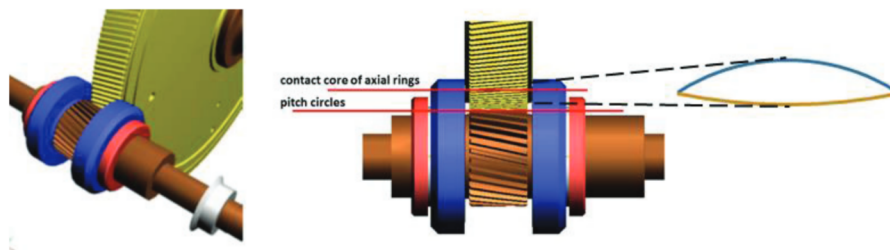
A 3D pattern with a pinion and a wheel and with the enlarged overlap of their rings.
